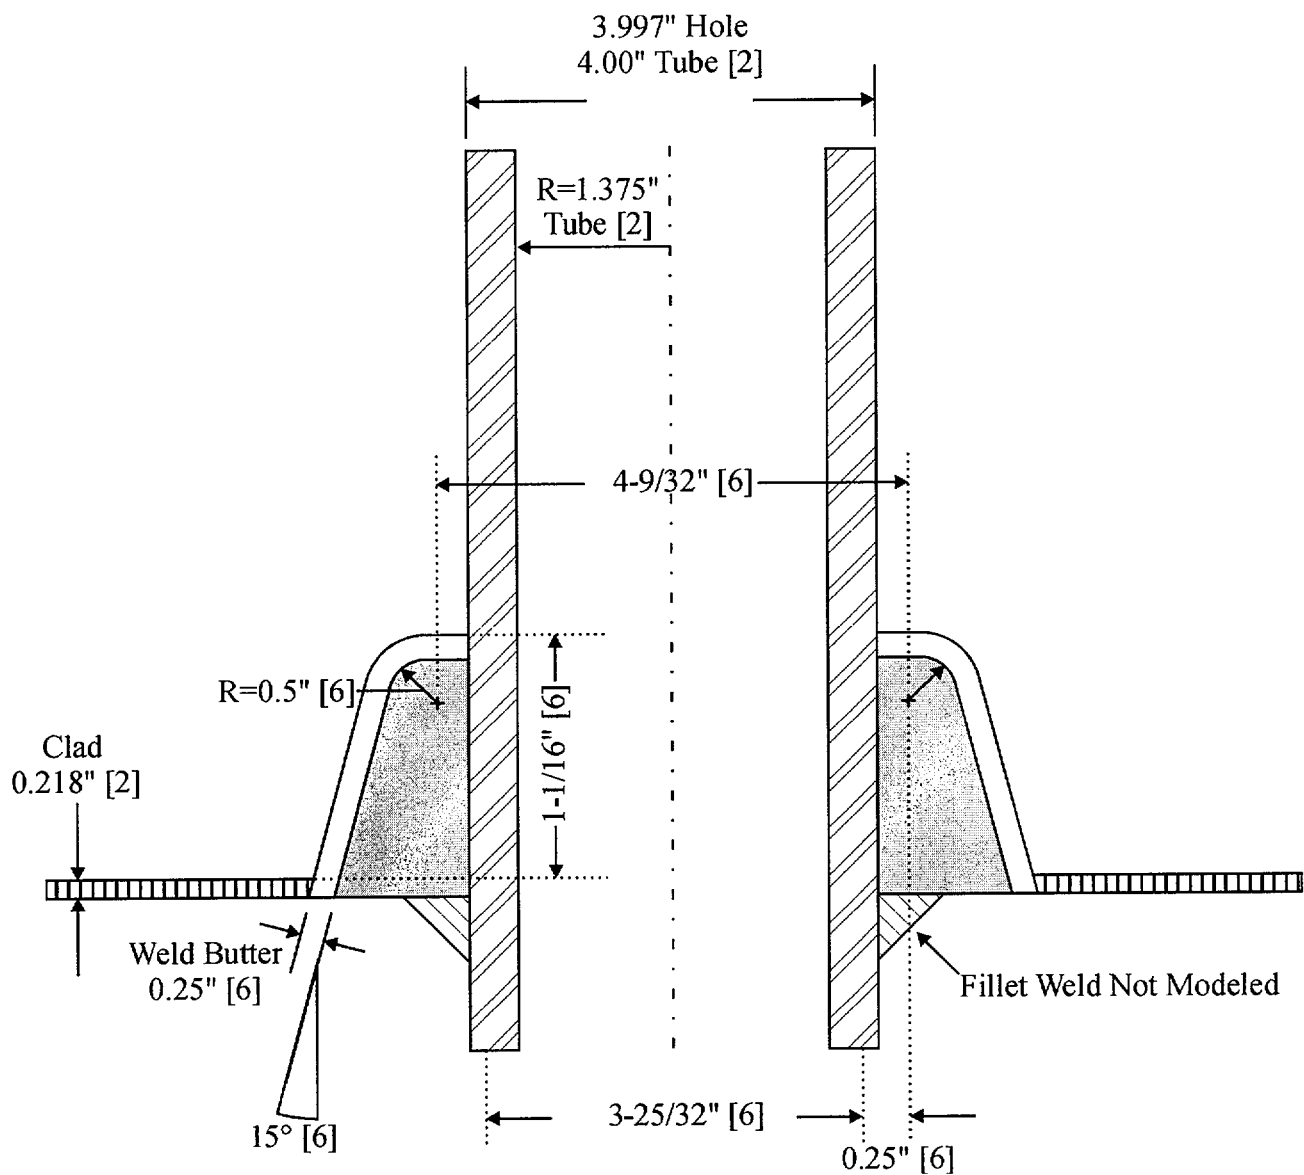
CRDM Penetration / J-Groove Weld Dimensions
